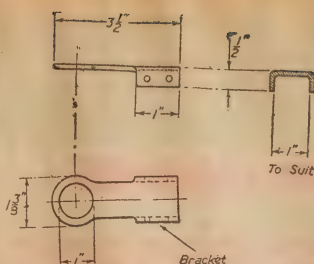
Details of lamp supporting column and bracket for lamp holder.
